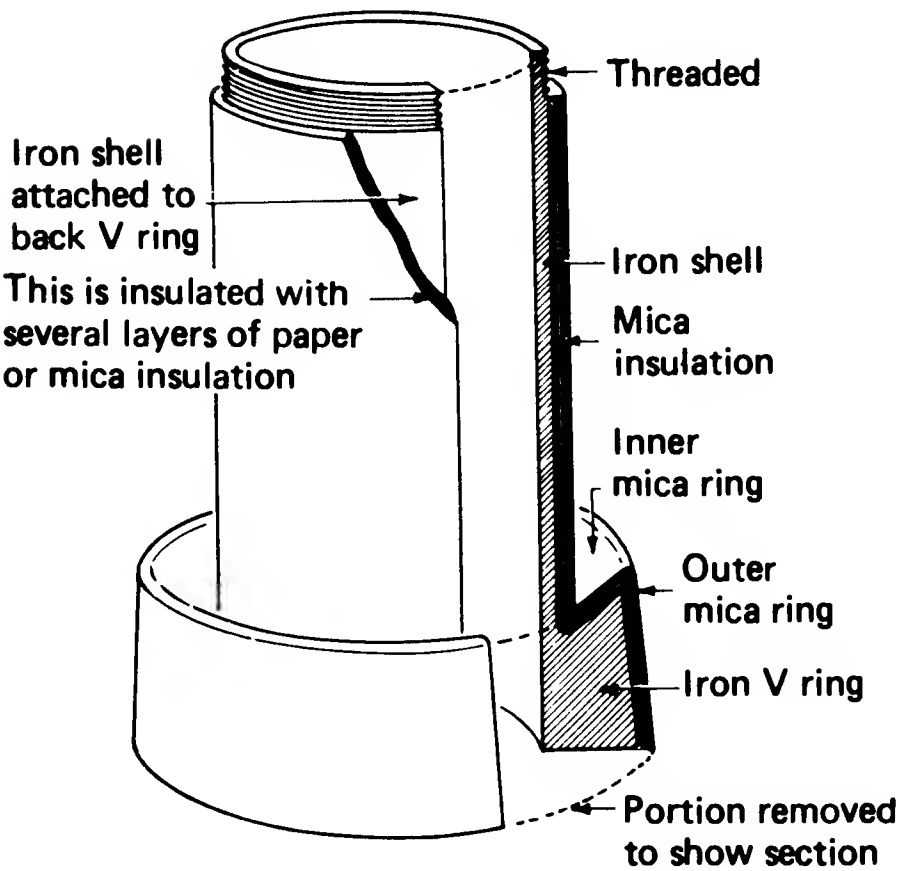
A commutator with a portion removed to show section and assembly.
